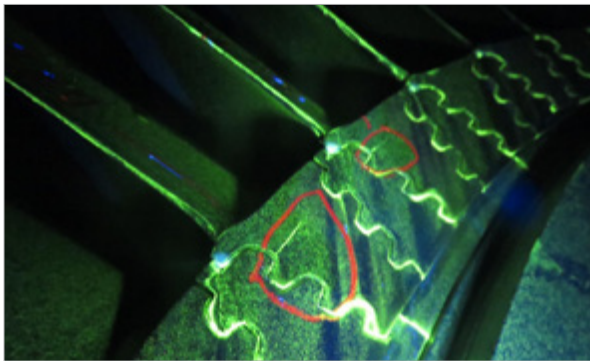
PHOTO: Cracking of blade roots due to high stress and chemical corrosion pitting
